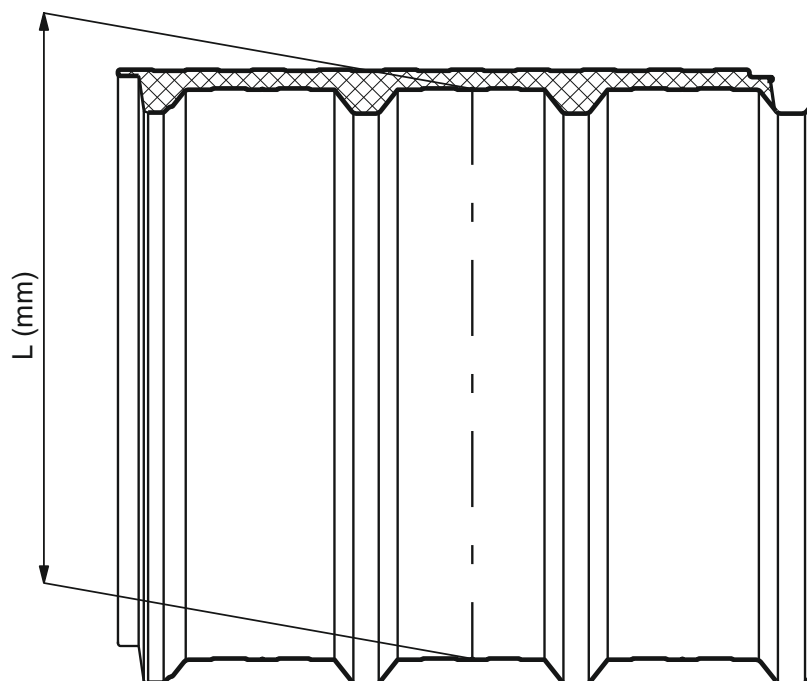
Depth, width and pitch of stiffeners and light profiling
